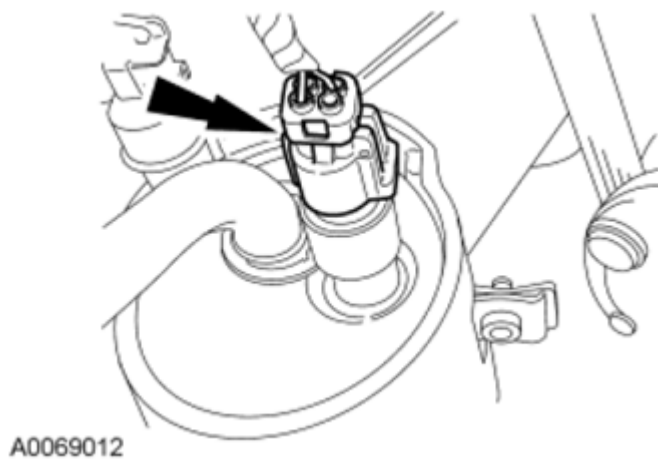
Locating A/C Low Charge Protection Switch Electrical Connector
